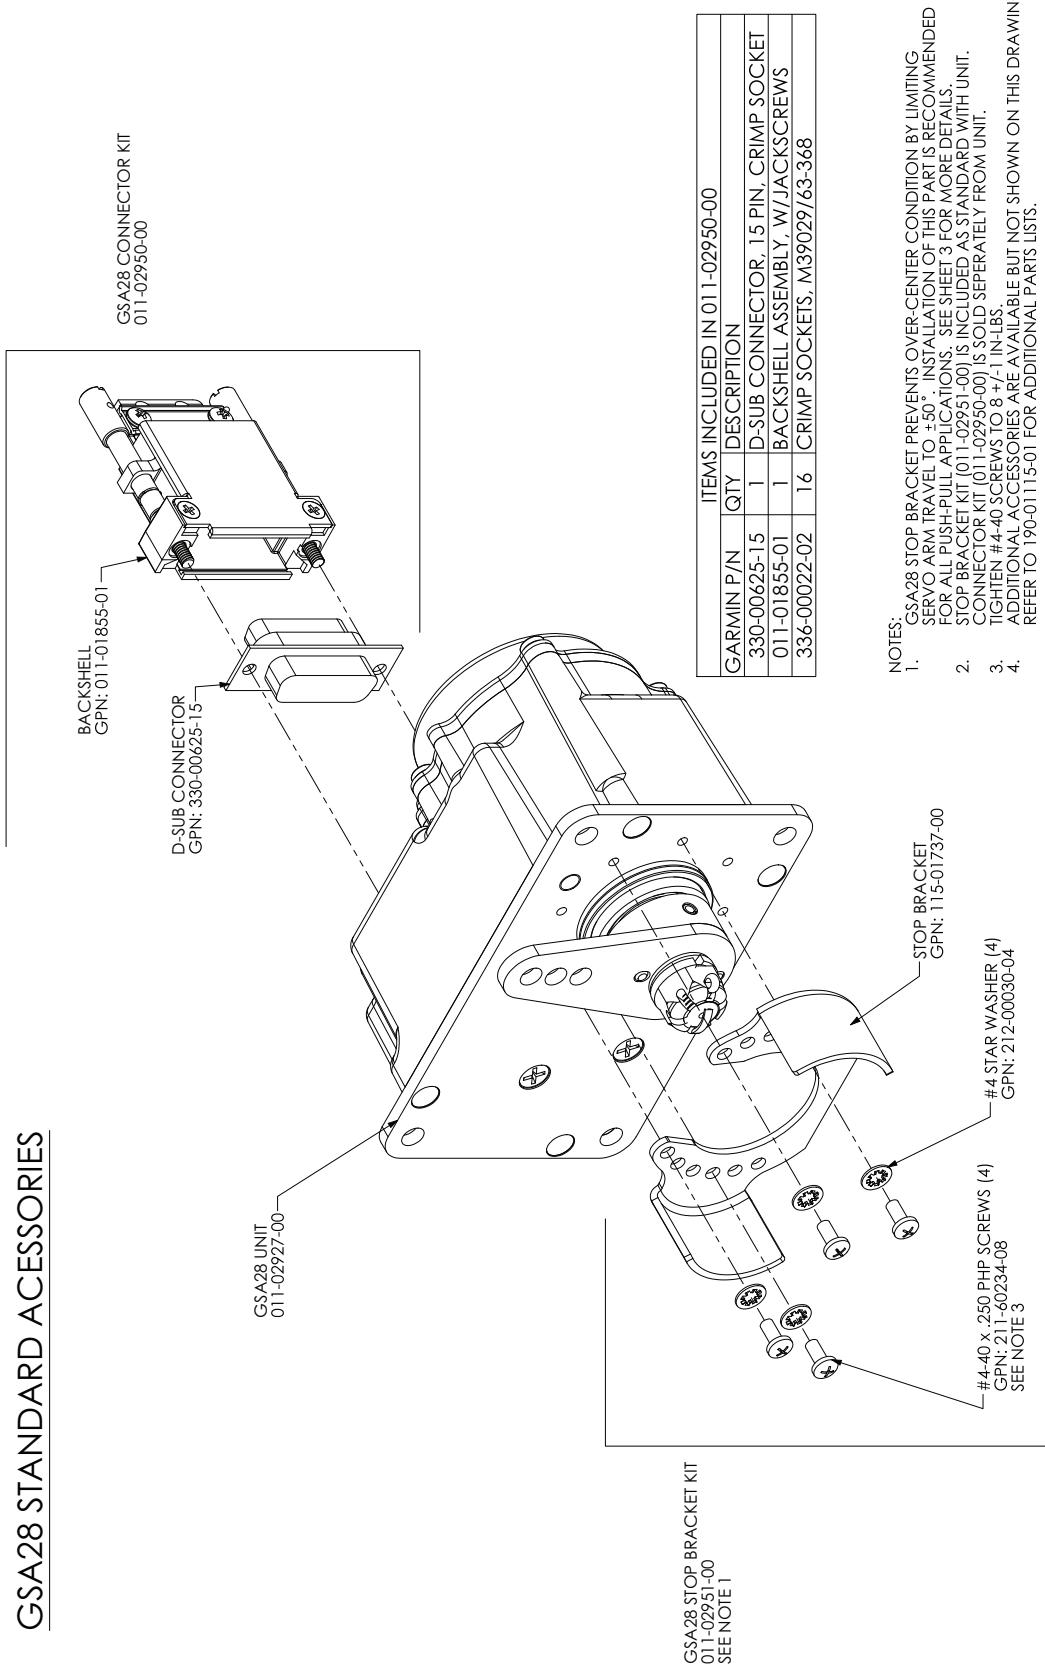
GSA 28 Accessory Installation Drawing
